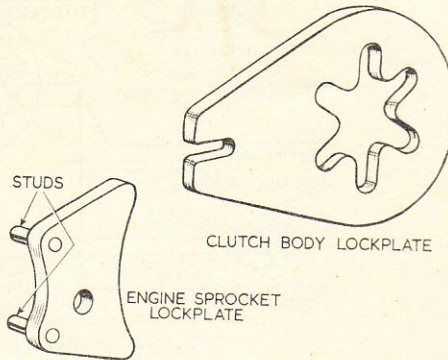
VILLIERS' LOCKING PLATES for releasing securing nuts on sprocket and clutch body.
